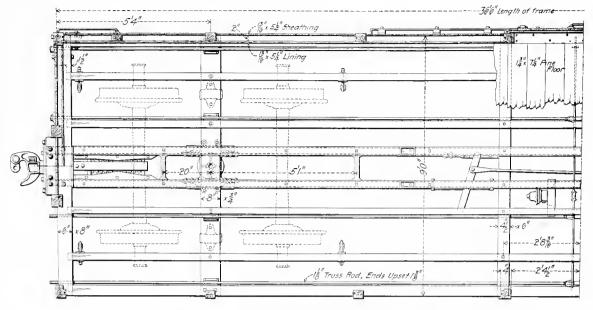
Half Plan of 36-ft. Box Car, Steel Channel Center Sills. C., M. & St. P. Capacity, 60,000 lbs.
